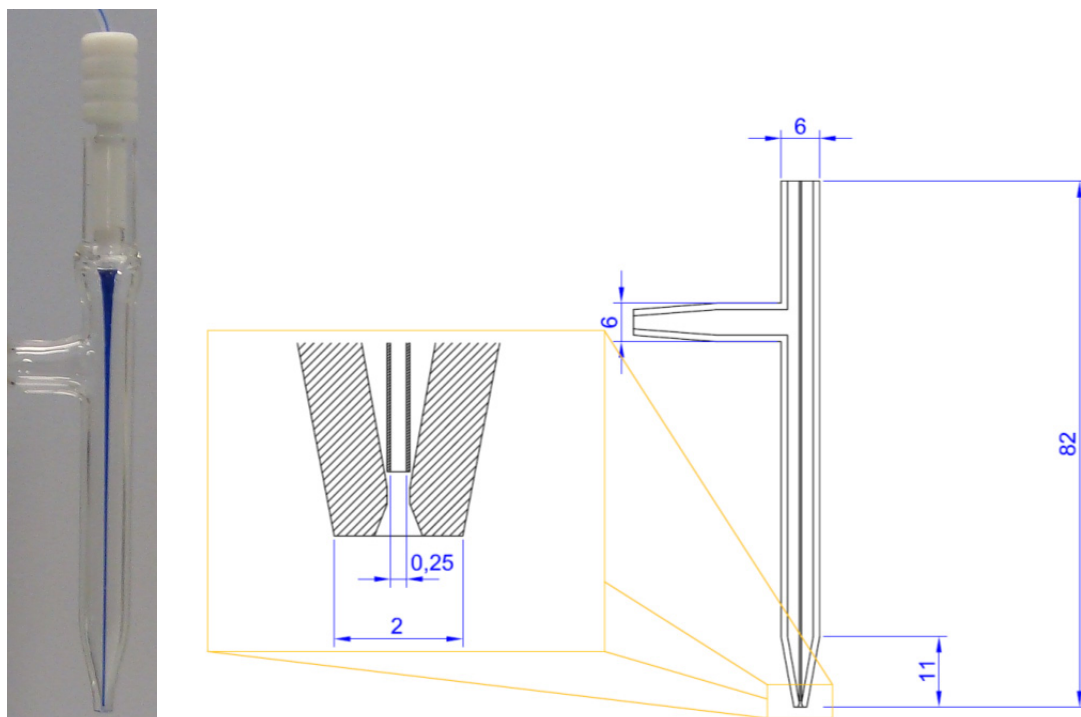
The spray nozzle tested for spraying ink during method development and technical drawing of the spray nozzle. Figure taken from [64].
